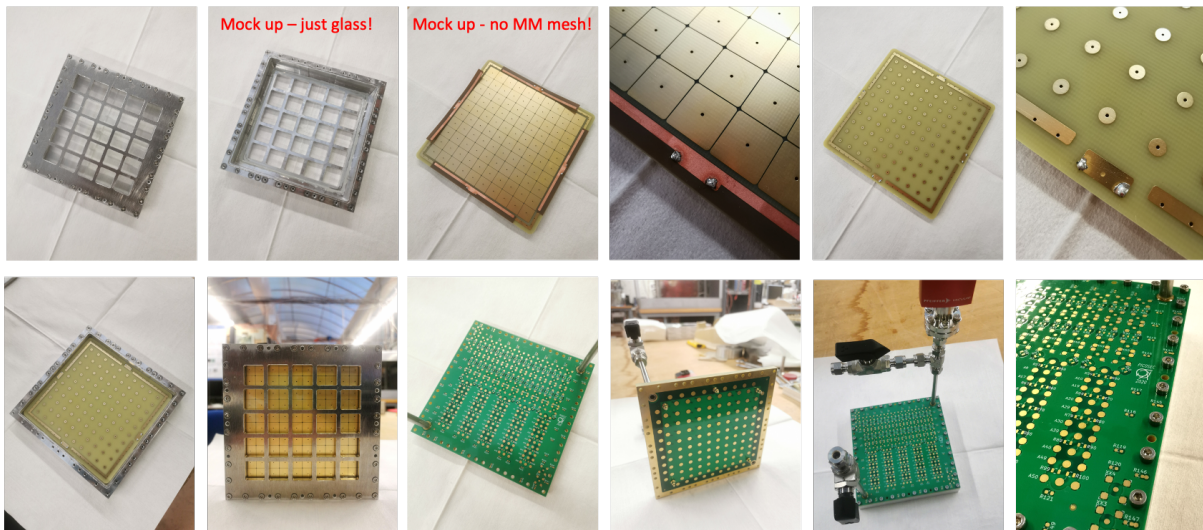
The routine of the aluminium housing's first assembly (described in detail in the text). The trial was conducted using some mock-up components.
